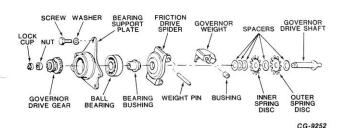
Old Style "Friction Drive" Governor Drive Shaft Exploded View
